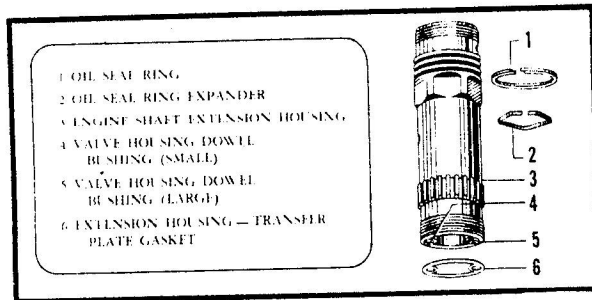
Engine Shaft Extension Assembly for Model 24D50
